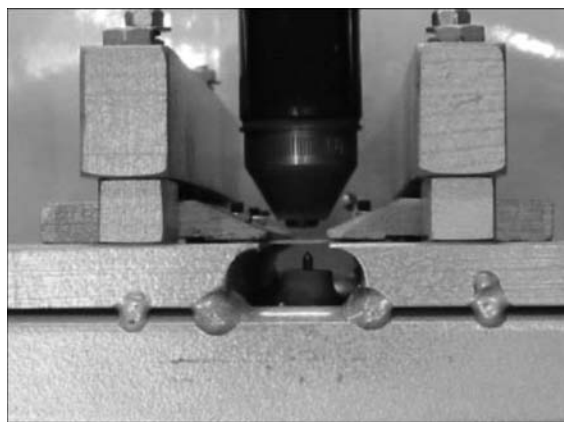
Two-sided PAW and nonconsumable electrode welding [32]
